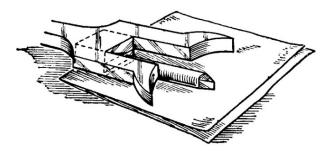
Showing Piece of Folded Paper Under Lever Notch
